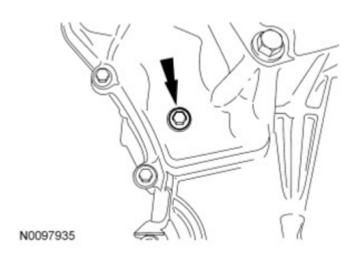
Locating Lower Front Cover Timing Hole Plug Courtesy of FORD MOTOR CO.
